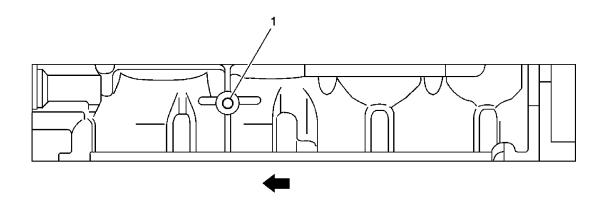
Identifying Bolt Size & Locations On Lower Crankcase - Bottom Courtesy of GENERAL MOTORS CORP.
